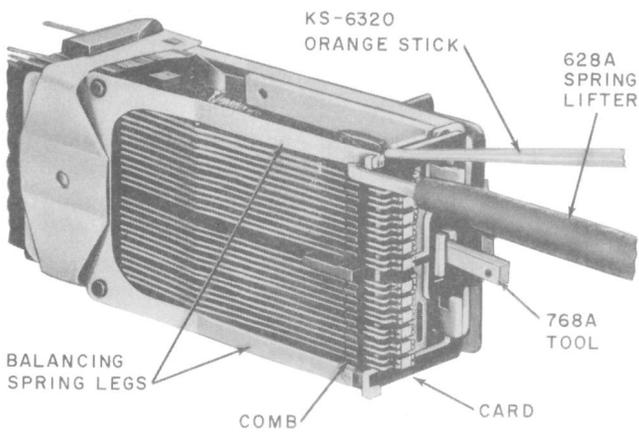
Method of Removing Balancing Spring Legs from Cords—AL-Type Relay
